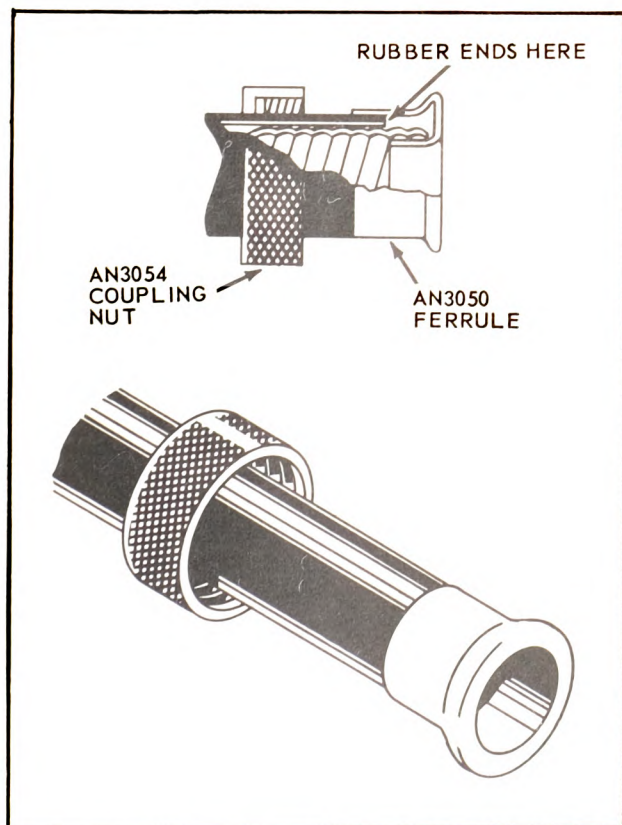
Rubber-Covered Flexible Conduit Ready for Swaging
